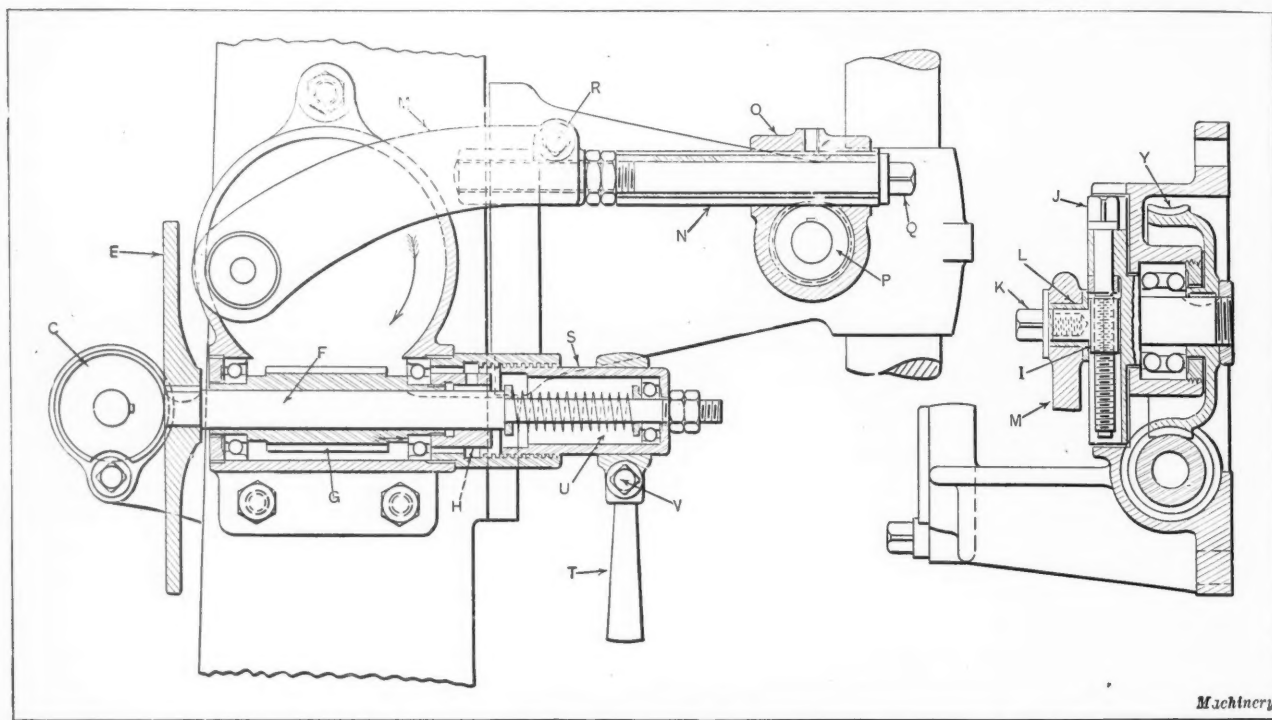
Sectional View of Automatic Feeding Device for High-speed Drilling
